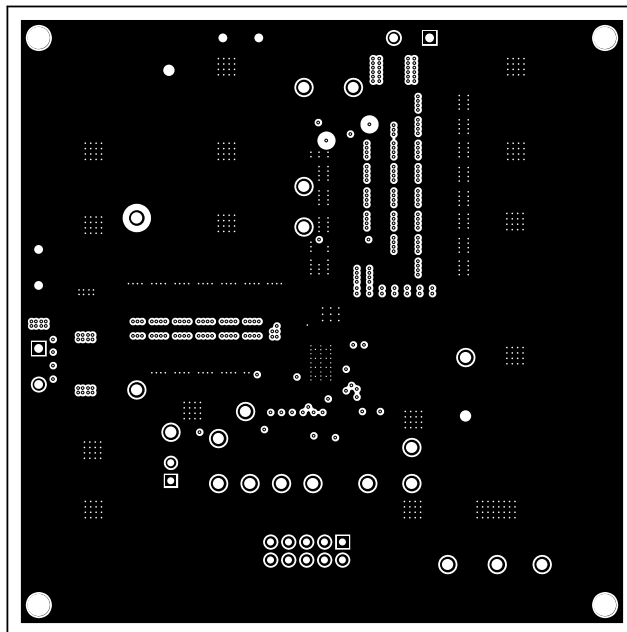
PWR-784EVM Top Solder Mask (top view)
